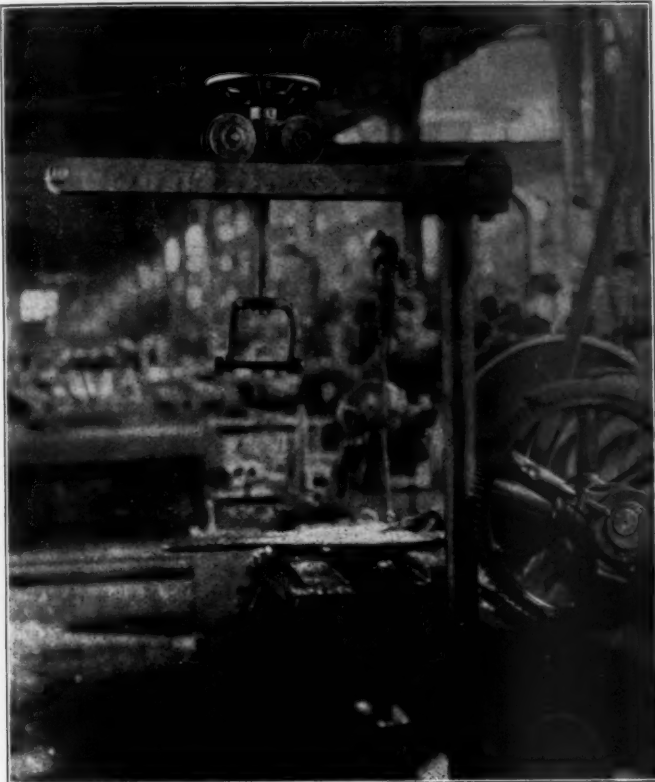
Crane for Removing Heavy Lathe Chucks.
